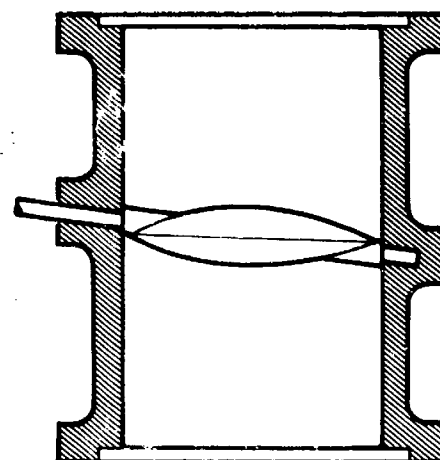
Butterfly Valve (Canted Shaft)
